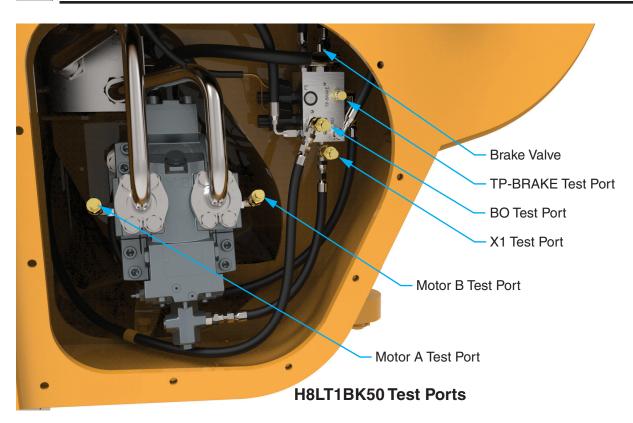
Komatsu D85X-15 (K50) Installation Test Ports and Brake Valve Locations
